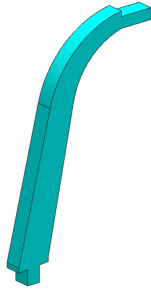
End Bowl Weld Lines
